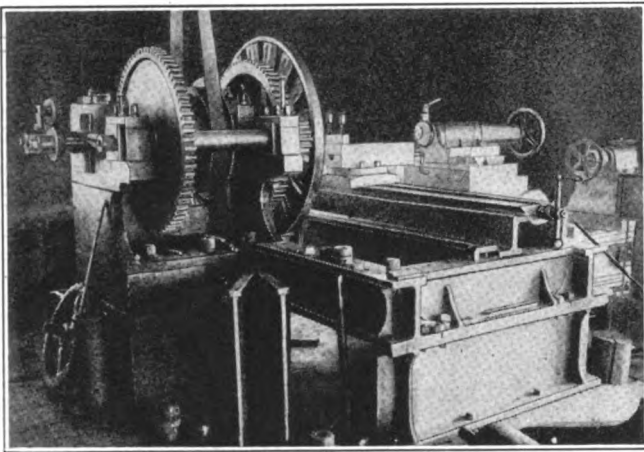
HEADSTOCK OF HOME-MADE GAP LATHE
